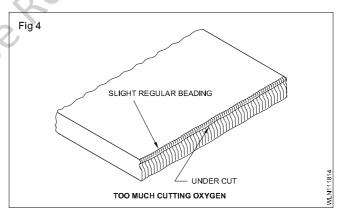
Extemely slow cutting speed. Pressure marks on the cut face indicate too much oxygen for the cutting conditions. Either the tip is too big, the cutting oxygen pressure is too high, or the speed is too slow as shown by the rounded or beaded top edge. On reducing the cutting oxygen volume to the correct proportions for the thickness of the cut, the pressure marks will recede toward the bottom edge until they finally disappear.
